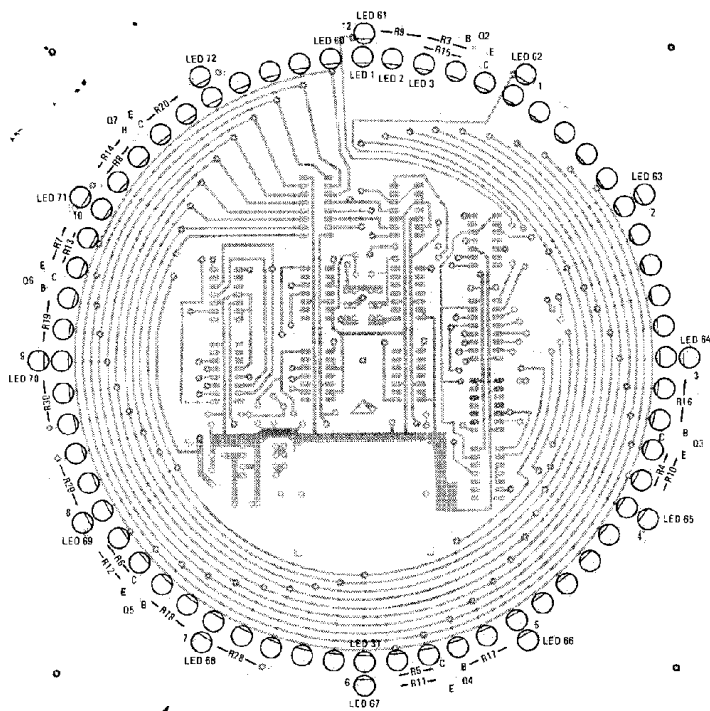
COMPONENT PLACEMENT for front of PC board.
